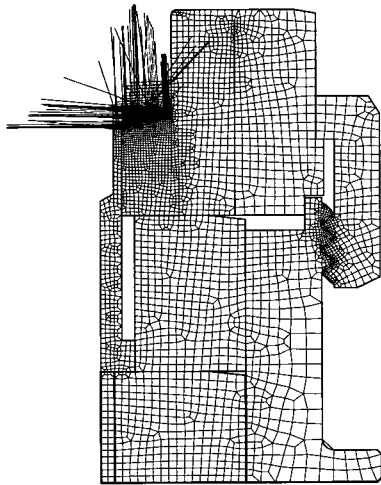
Metal flows in aluminum cold forging of a VTR head-drum
